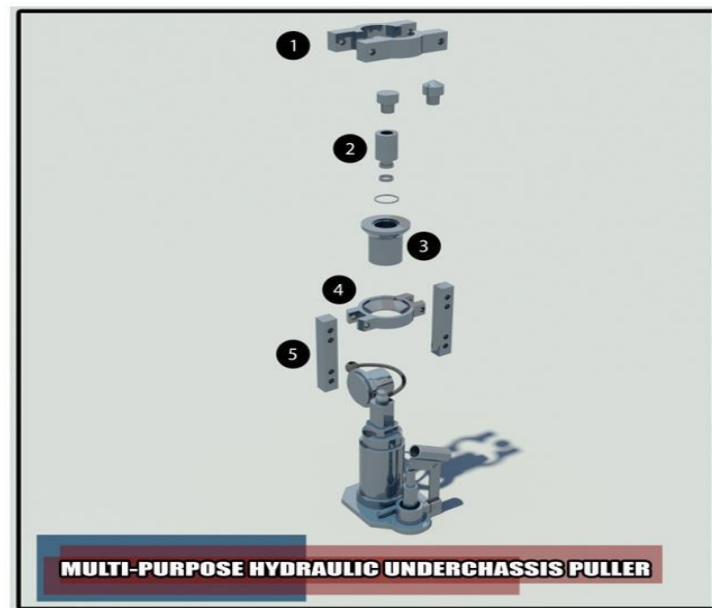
Multi-Purpose Hydraulic Puller for Underchassis Hydraulic Steering Wheel Puller Parts
